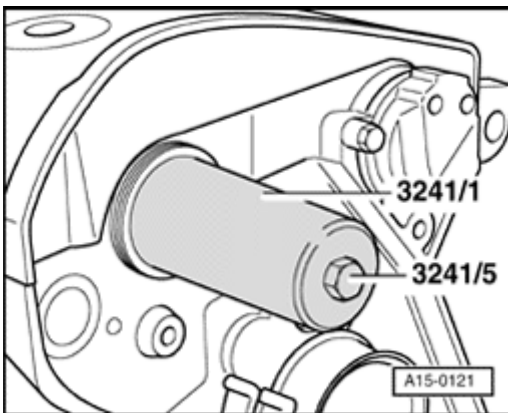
Pushing In Oil Seal As Far As It Will Go Using Thrust Sleeve 3241/1
